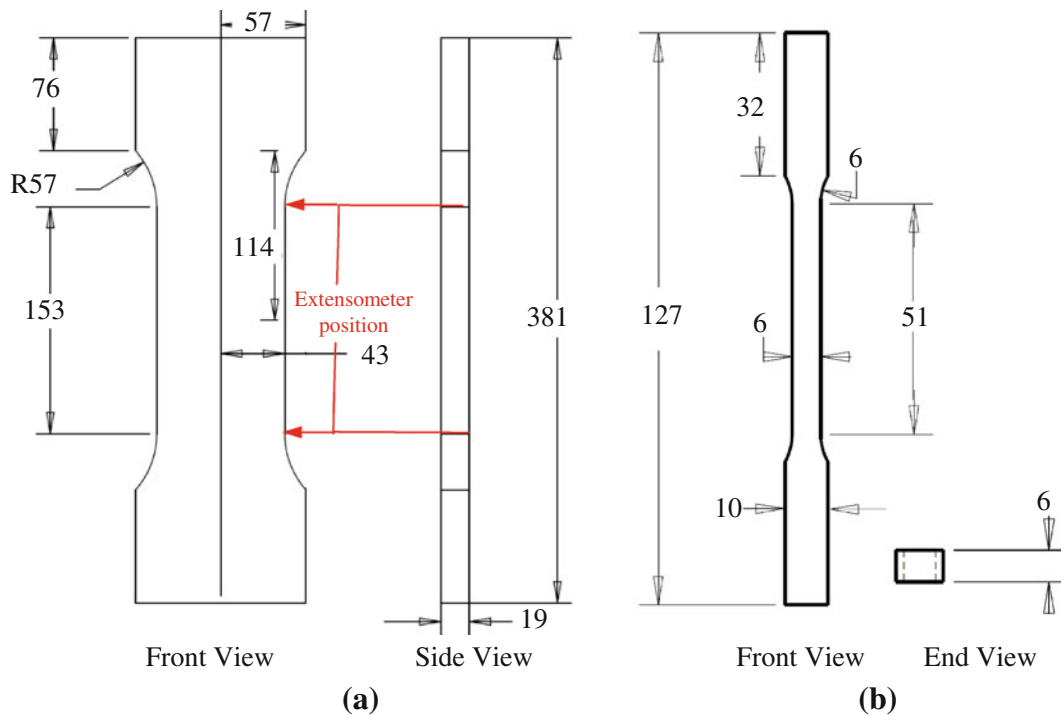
Tensile testing specimens with dimensions in mm. (a) Front and side views of tensile test plate used for measurements with steel containing centerline shrinkage having a 19-mm-thick by 86-mm-wide gage section, and (b) front and end views of smaller test specimen used in tensile testing of the steel without porosity having a 6 mm square gage section.
